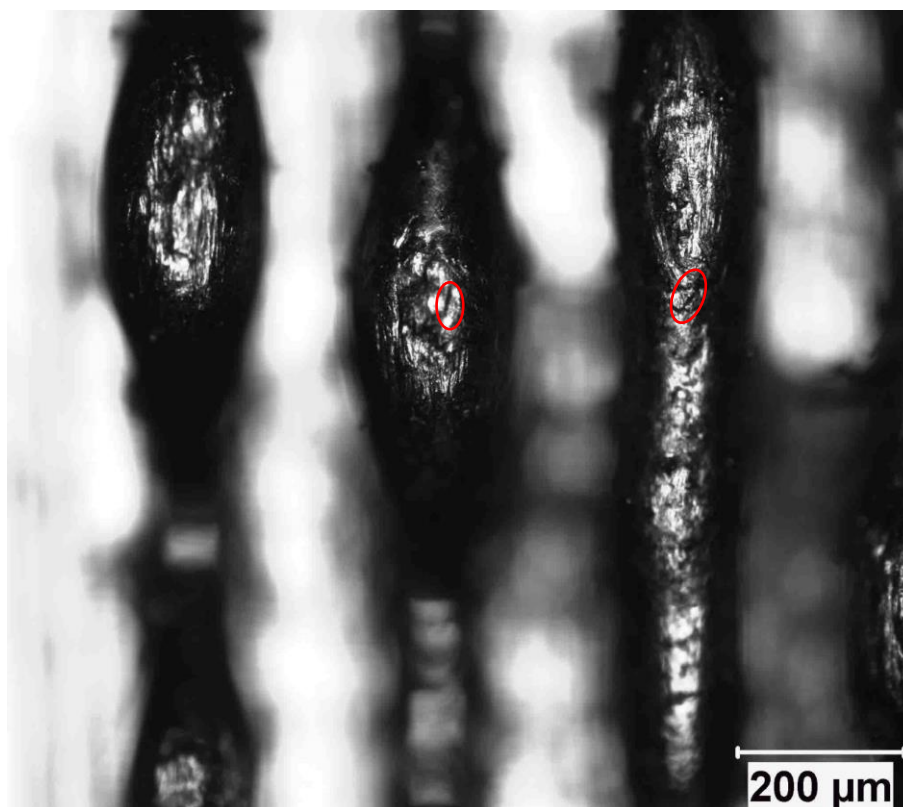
Top view of the bottom of weld track with high energy parameters. Cracks at the bottom of melting pool are labelled.
